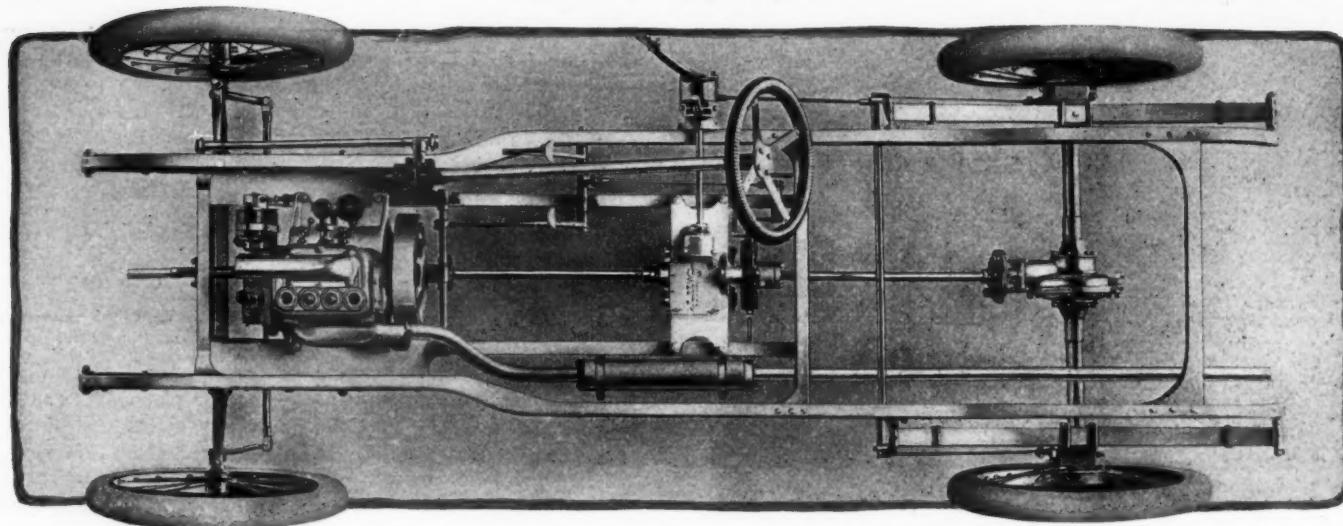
Chassis of Swift light car with four-cylinder engine and miniature car construction throughout
